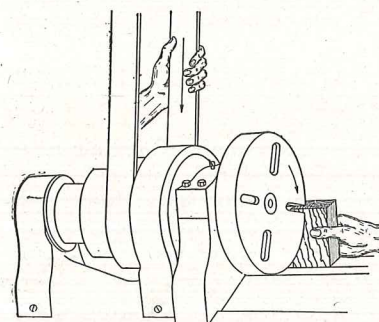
Removing Tight Fitting Face Plate from Lathe Spindle
